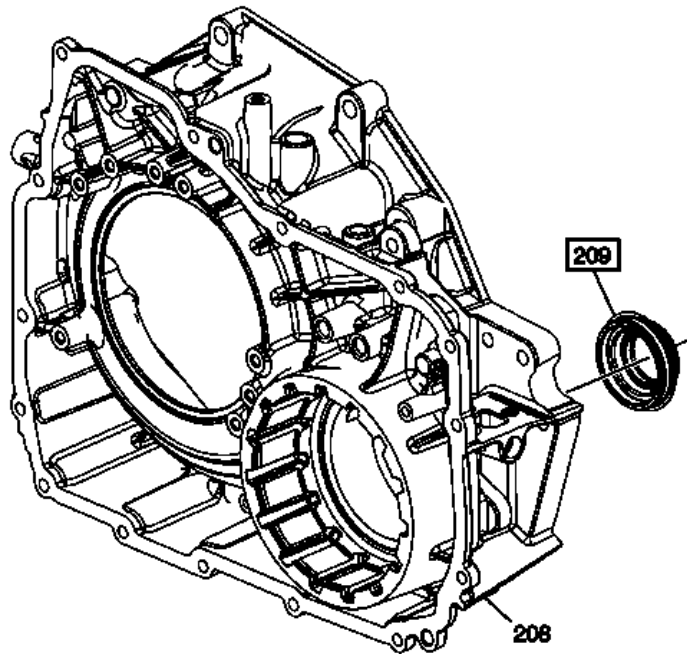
Front Wheel Seal Kit (Gen 1 And 2) 19258415
